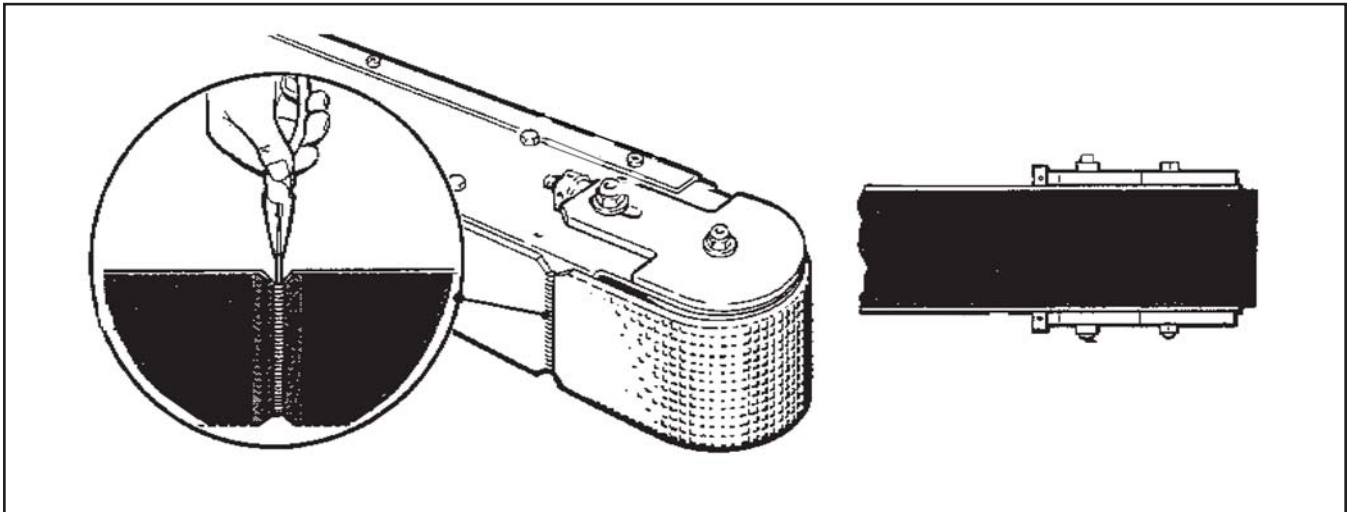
Drive Belt Replacement/Tension Adjustment
